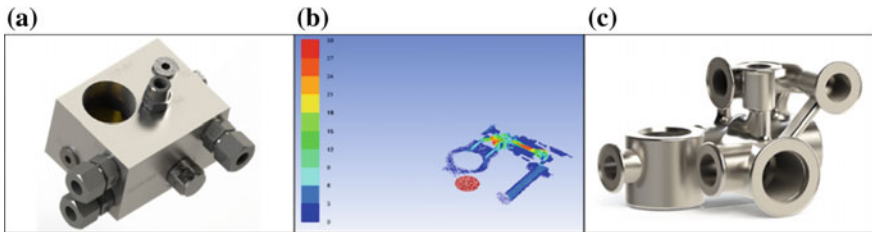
a Initial design of the manifold block; b CFD analysis; c final design of the manifold block manufactured by means SLS technology [19]
